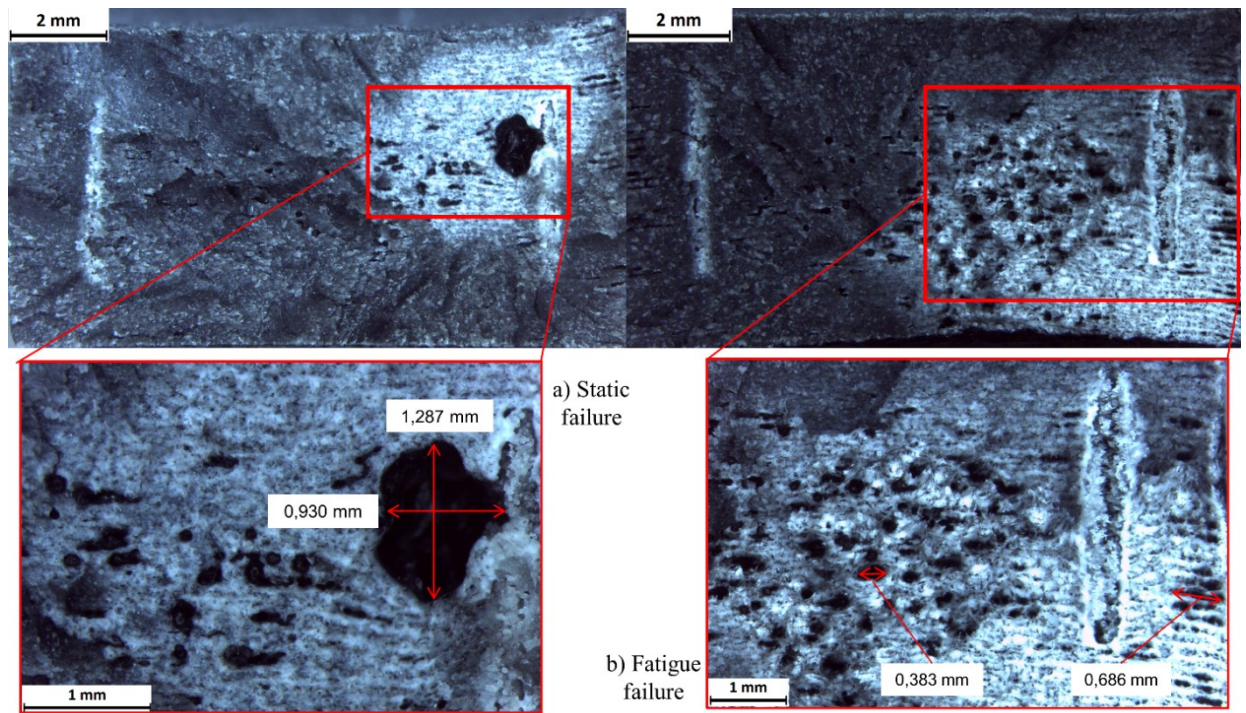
Fracture surfaces for: a) static tensile tests; b) fatigue tests.
